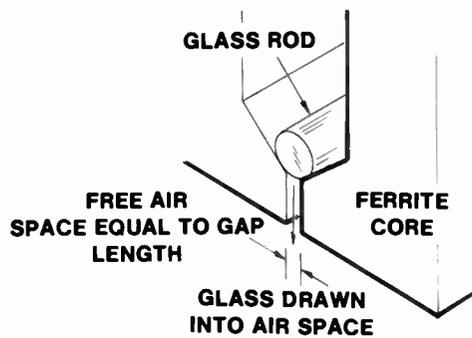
Capillary Bonding Technique for Ferrite Heads
